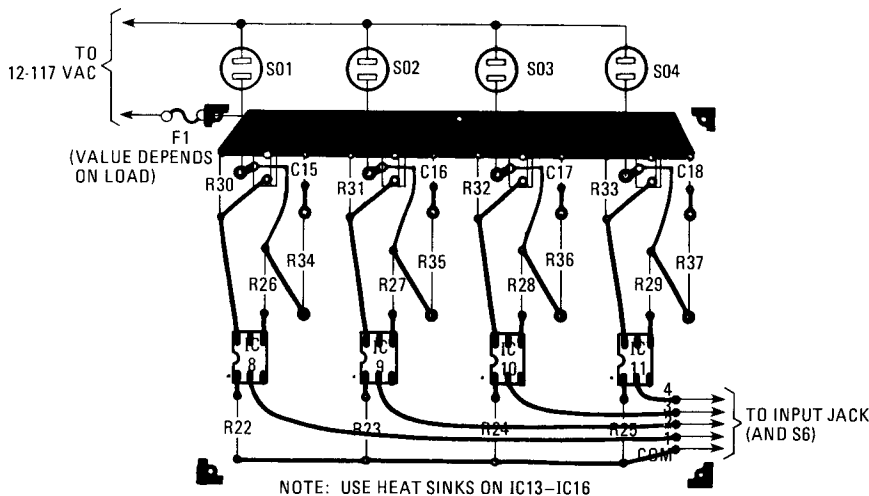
SIX-PIN TRIAC DRIVERS are inserted into eight-pin IC sockets with pins 4 and 5 removed.
